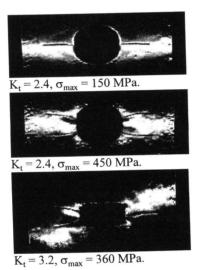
Fatigue cracks in the notched GLARE 2 specimens.
